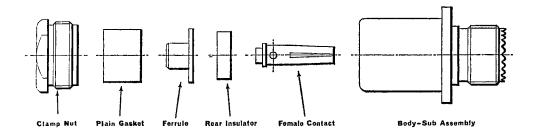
D-Assembly instructions-UHF Type plugs and sockets-Pressure sleeve cable clamp
